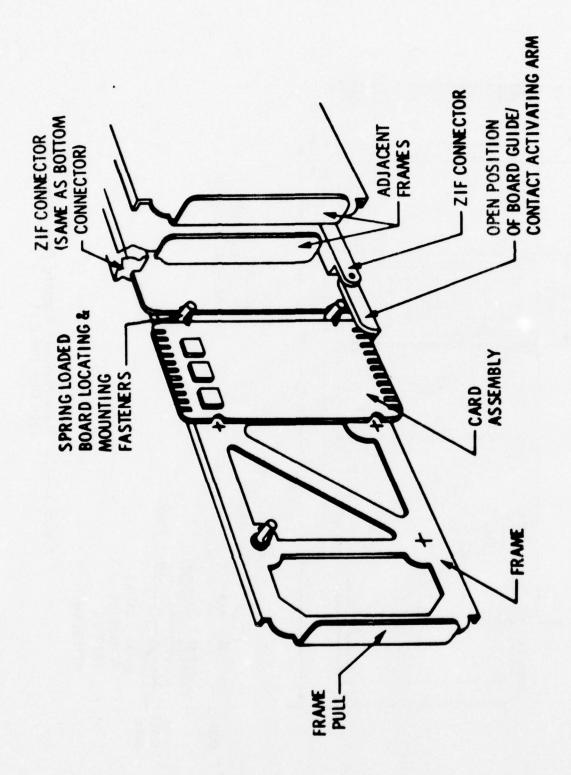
Assembly of Cards into Frame (ZIF Rack Concept)
